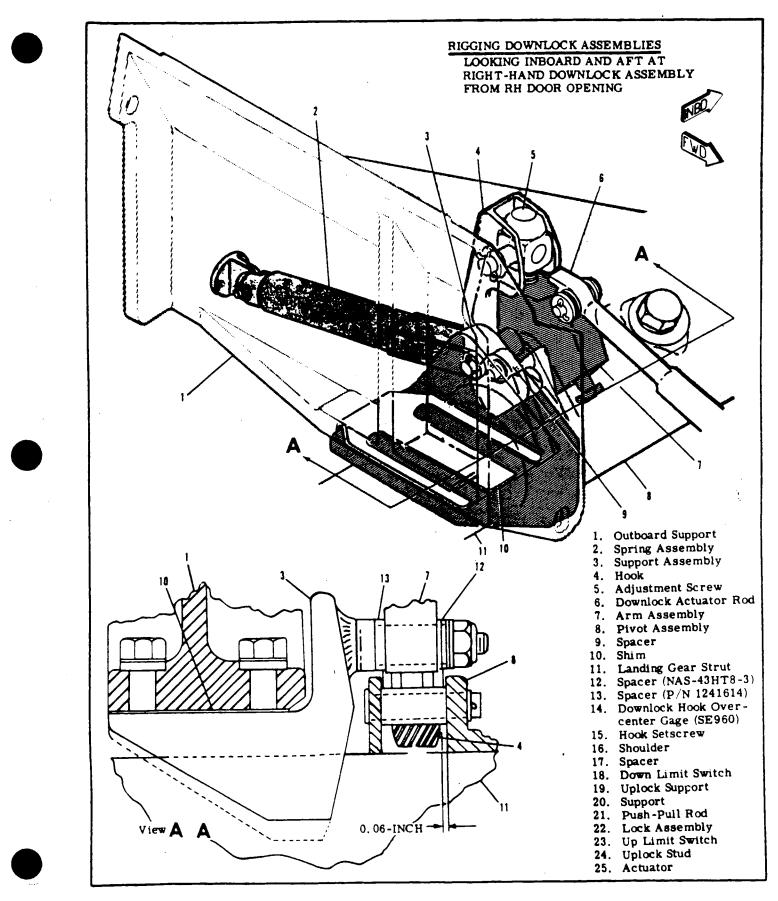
Rigging Main Landing Gear (Sheet 1 of 4)
